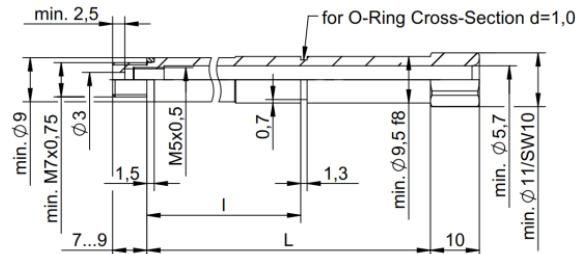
Mounting sleeve M7 Type 6595ASP..
